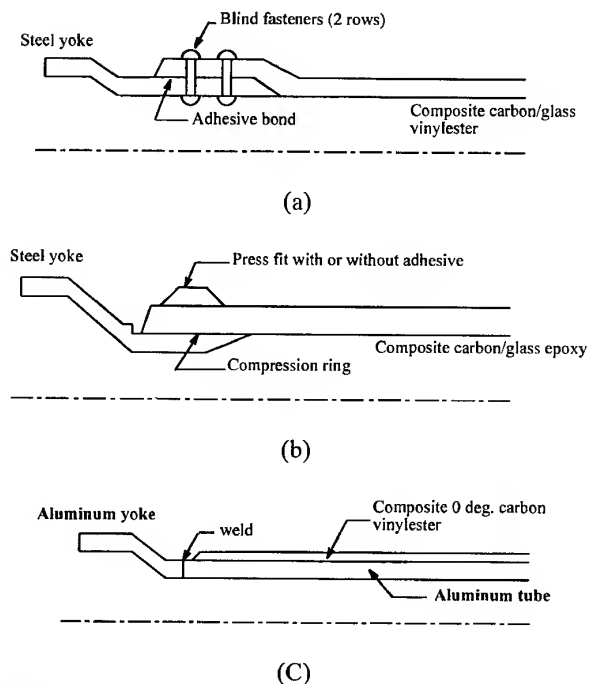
Joining methods between the composite drive shafts and yokes: (a) Hercules design (b) Ciba-Geigy design (c) Dana-MMFG design.
